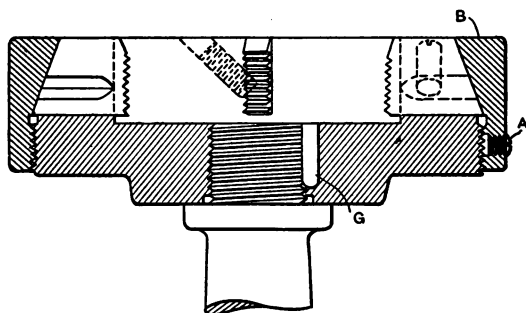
Another Type of Inserted Chaser Die with Adjustable Blades
